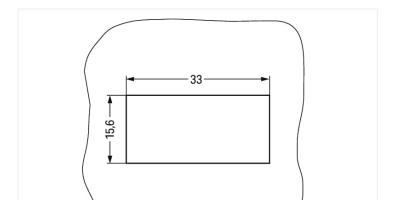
Plate thickness: 1 ... 3 mm Cutout tolerance: + 0.1 mm
